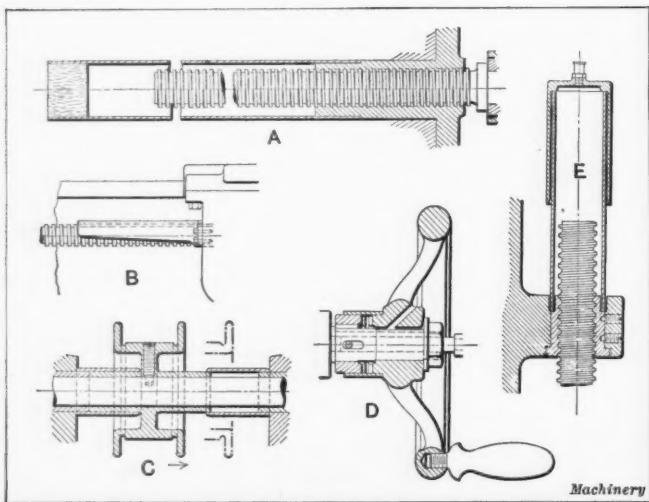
Tubes for protecting Feed-screws, Splined Shafts and Clutches
